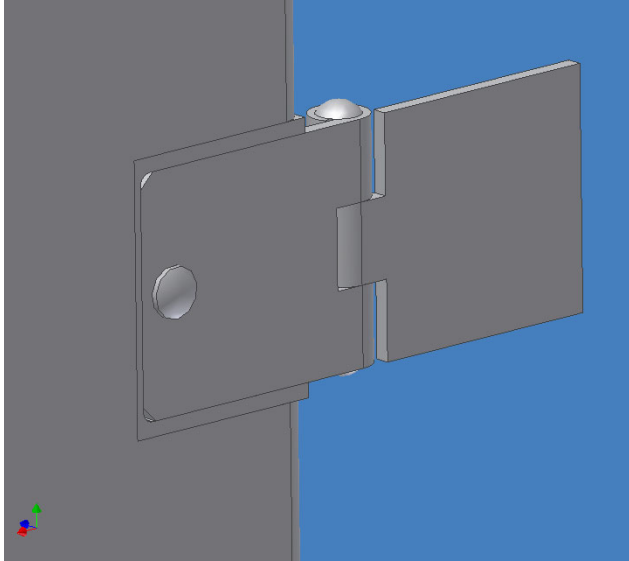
Exterior view of a hinge subassembly attached to the release mechanism with one sturdy fastener bolt
